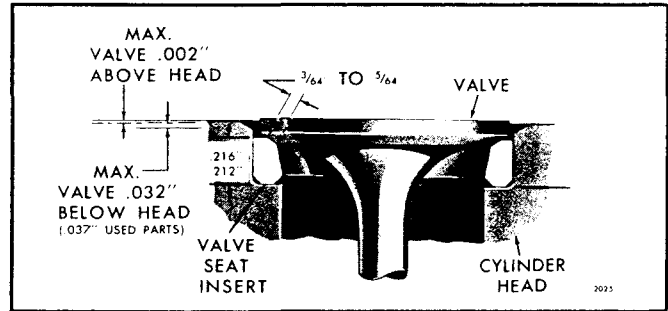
Relationship Between Exhaust Valve, Insert and Cylinder Head (Two Valve Head)
